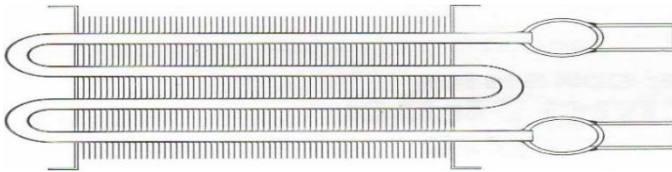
Top Section View of Typical 4-Row Full Circuit Serpentine Coil
